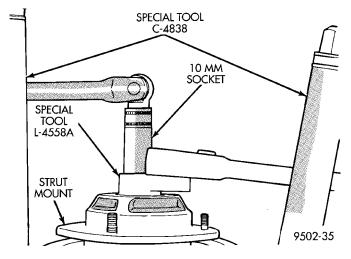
Strut Shaft Retaining Nut Removal Tools
